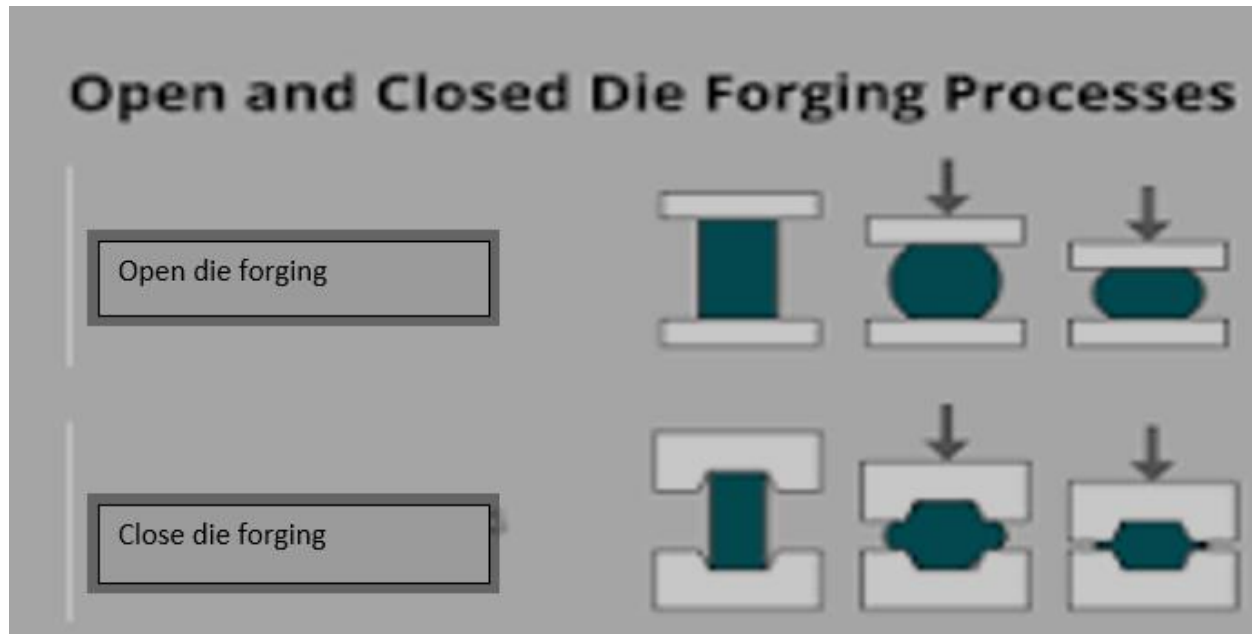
Impression Die Forging (Closed Die) and die forging
